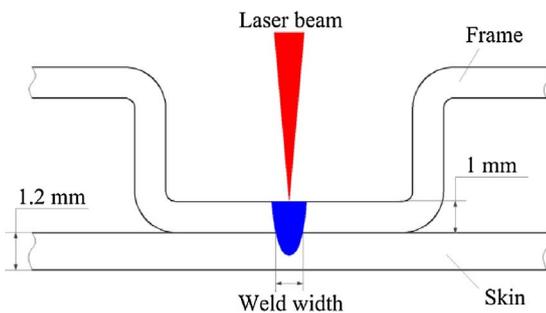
Diagram of the laser welded joint in the stainless steel vehicle bodies.
